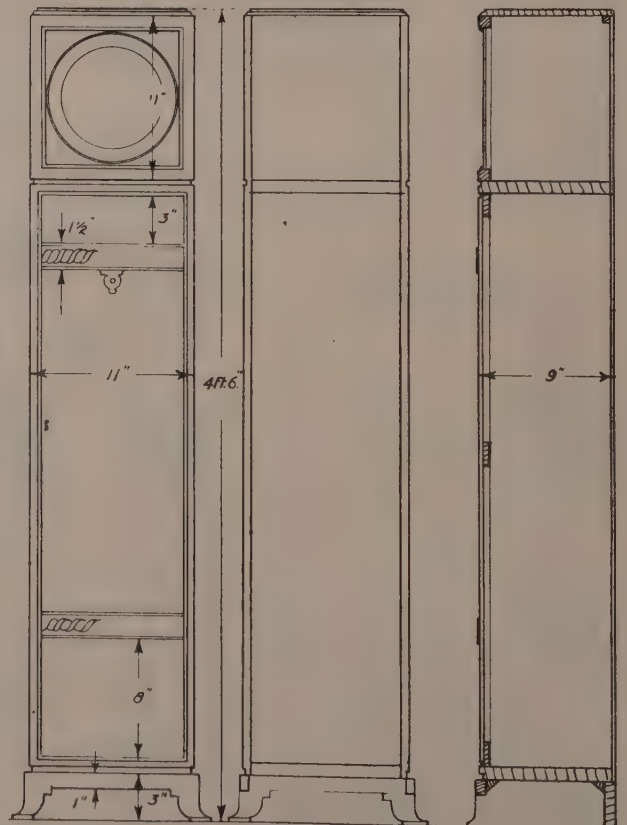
ELEVATIONS AND SIDE SECTION.
